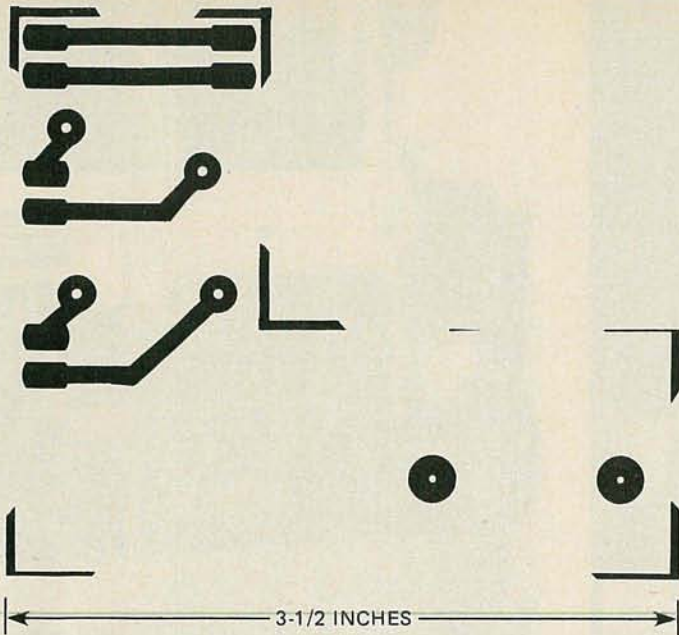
THE FOIL PATTERN for the SPACE/RETURN board is shown here full size.
